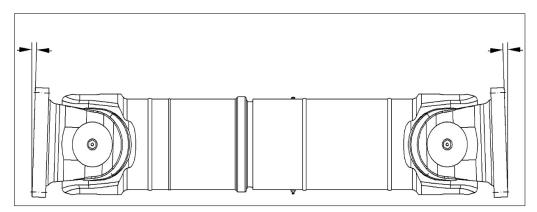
Checking the difference in joint angle between the faces of the connecting flanges
